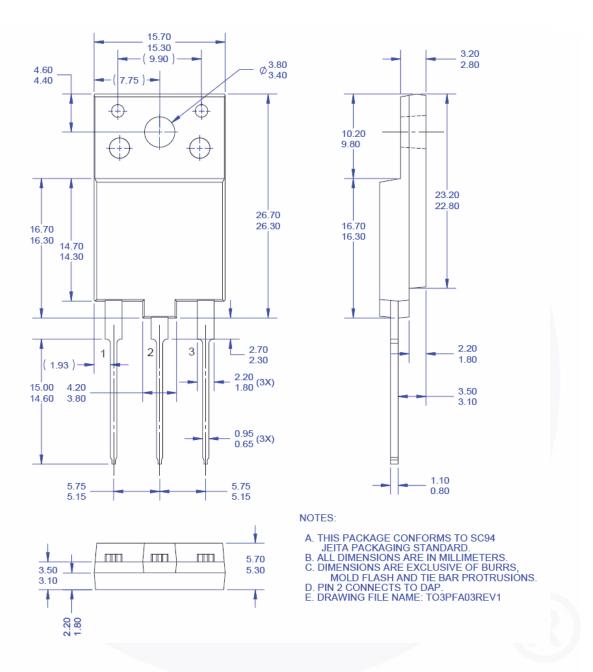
TO3PF, Molded, 3-Lead, Full Pack (AG)
